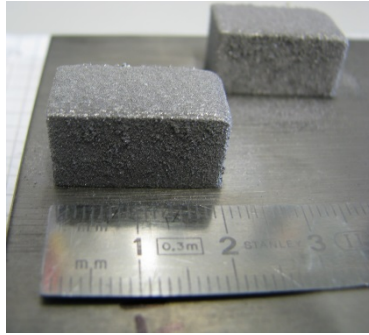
A representative picture of the three-dimensional Ti-6Al-4V part fabricated using BeAM machine by direct laser melting.
